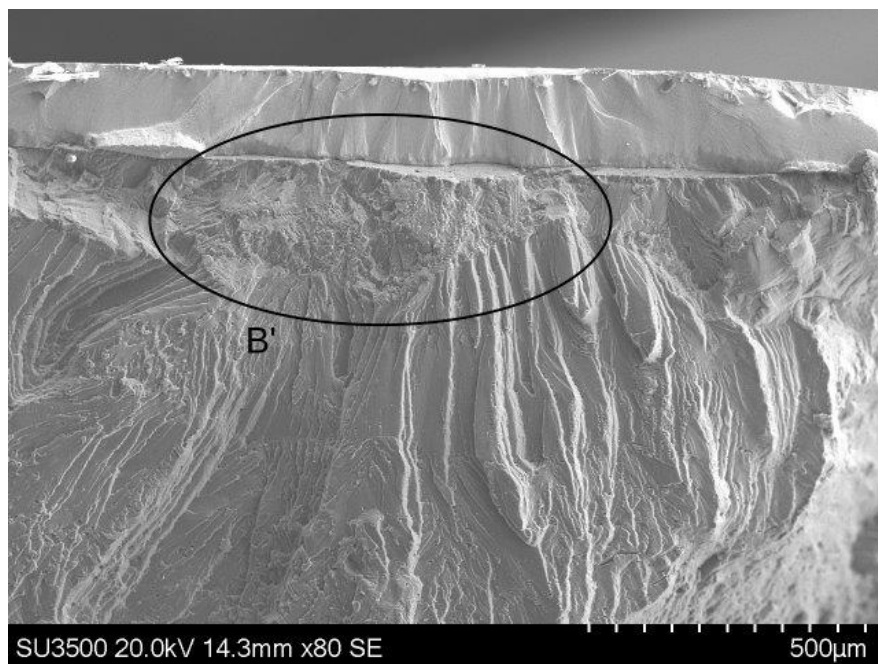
Location B' on the fracture surface of Specimen H1. The area in the circle indicates a fast fracture zone in the substrate, and is shown in more detail in Figure 4.27.
